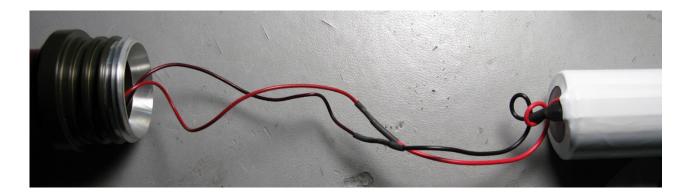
Securing battery wires to the watertight bulkhead. The wires shown are about as long as one would want; it may be easier to cut the battery-pack wires shorter than what is shown. Note the use of heat-shrink tubing to assure that the solder connections do not short to each other or to the housing interior. Be sure to place the o-rings on the watertight bulkhead before soldering (the o-rings are not shown in this photograph).
